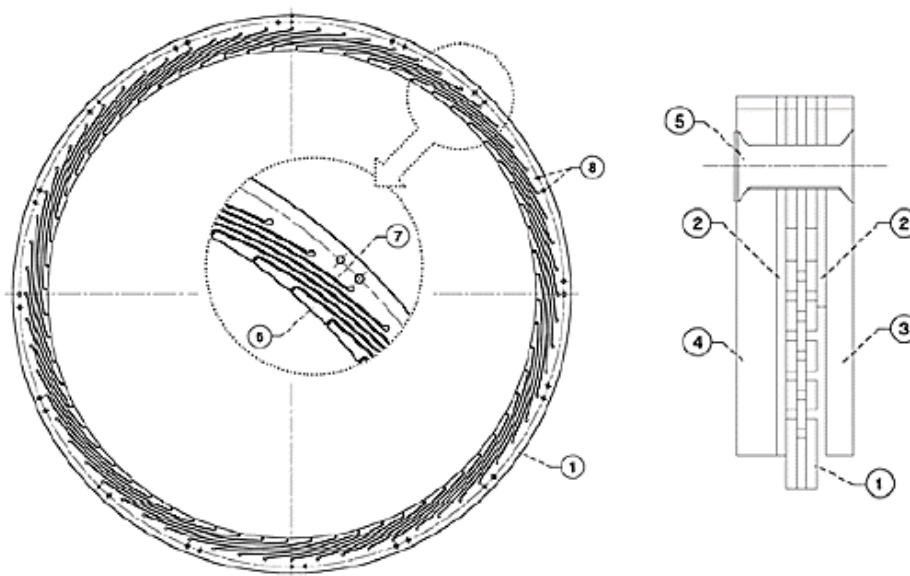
Finger seal assembly: 1 – finger element, 2 - spacer, 3 – forward cover plate, 4 – aft cover plate, 5 - rivet, 6 – finger contact pad, 7 – finger, 8 – indexing and rivet holes. From Proctor *et al.* [2002].
